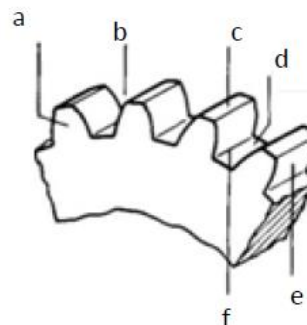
Tothing (a) tooth (b) tooth space (c) tip surface (d) root surface (e) tooth flank (f) fillet surface
